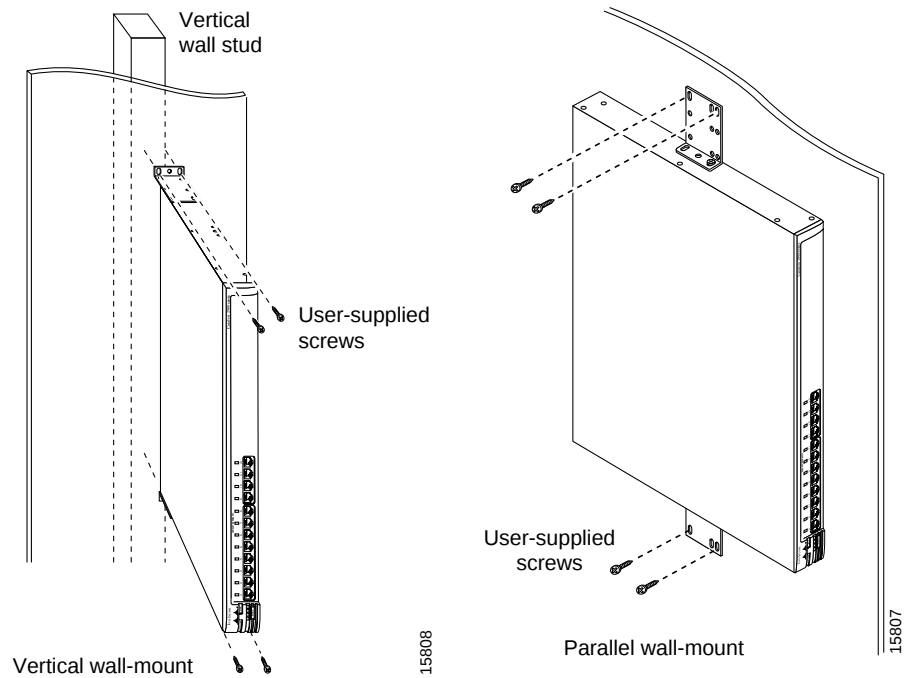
Attaching Brackets for Parallel and Vertical Wall-Mounting
